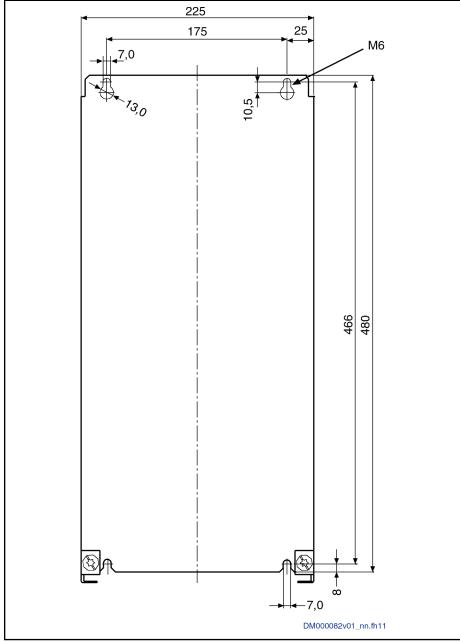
Boring dimensions HCS03.1E-W0100 and HCS03.1-W0150
